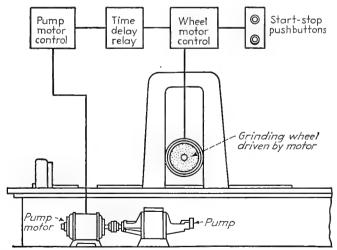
Large grinders use pumps driven by separate motors. Pump motor need not be in operation when grinding wheel is not running, but it is sometimes desirable to allow wheel motor to coast to rest before shutting down pump motor. This can be done electrically by means of time delay relay to permit pump motor to operate for predetermined time after wheel motor is shut down. For the starting sequence, an arrangement similar to that in Fig. 462 may be used.
